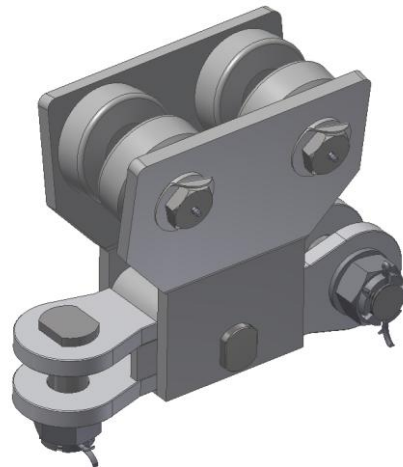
horizontal - vertical bracket fixing system arrangement.
